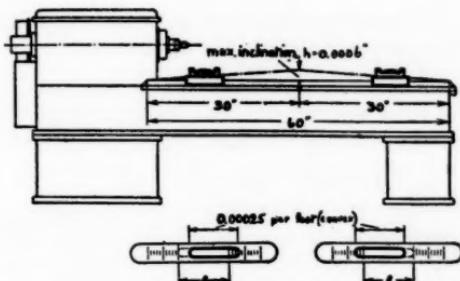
Unilateral tolerances used to specify convexity of front way of lathe.
